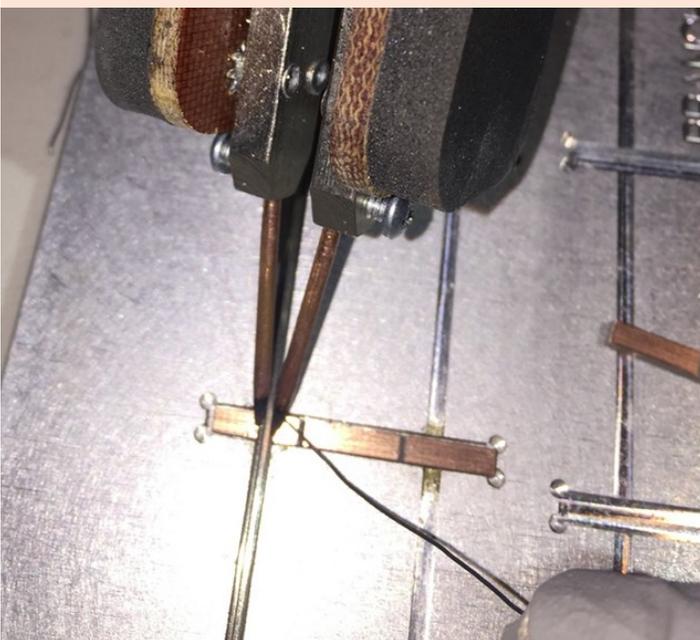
Soldering rail to PCB ties using tweezer attachment on a Resistance Soldering Unit
